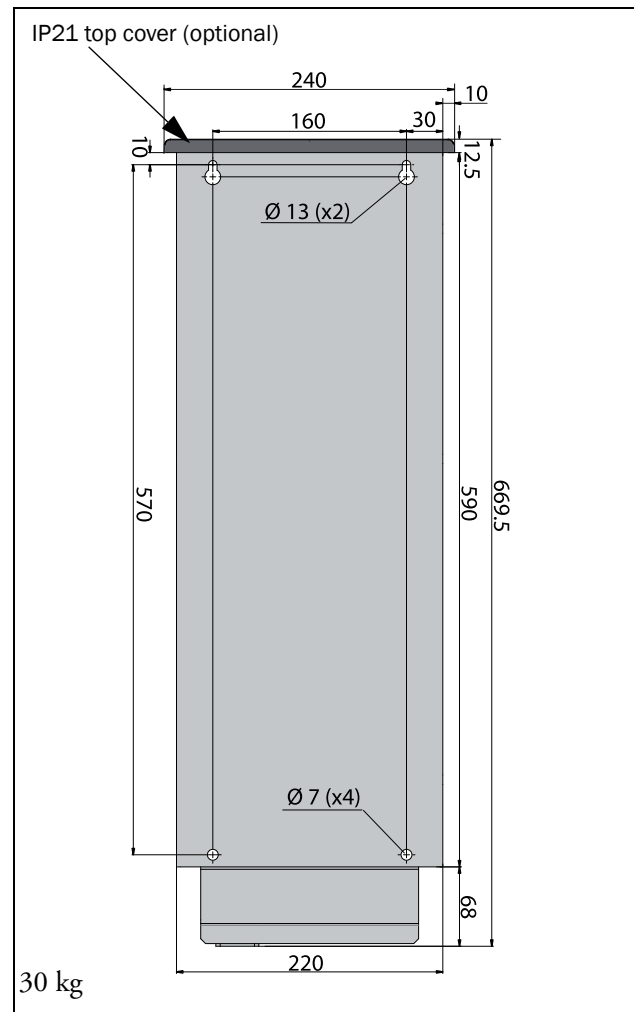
Fig. III Dimensions VFX/FDU model 48-060 to 48-088 (Size D2), backside view
